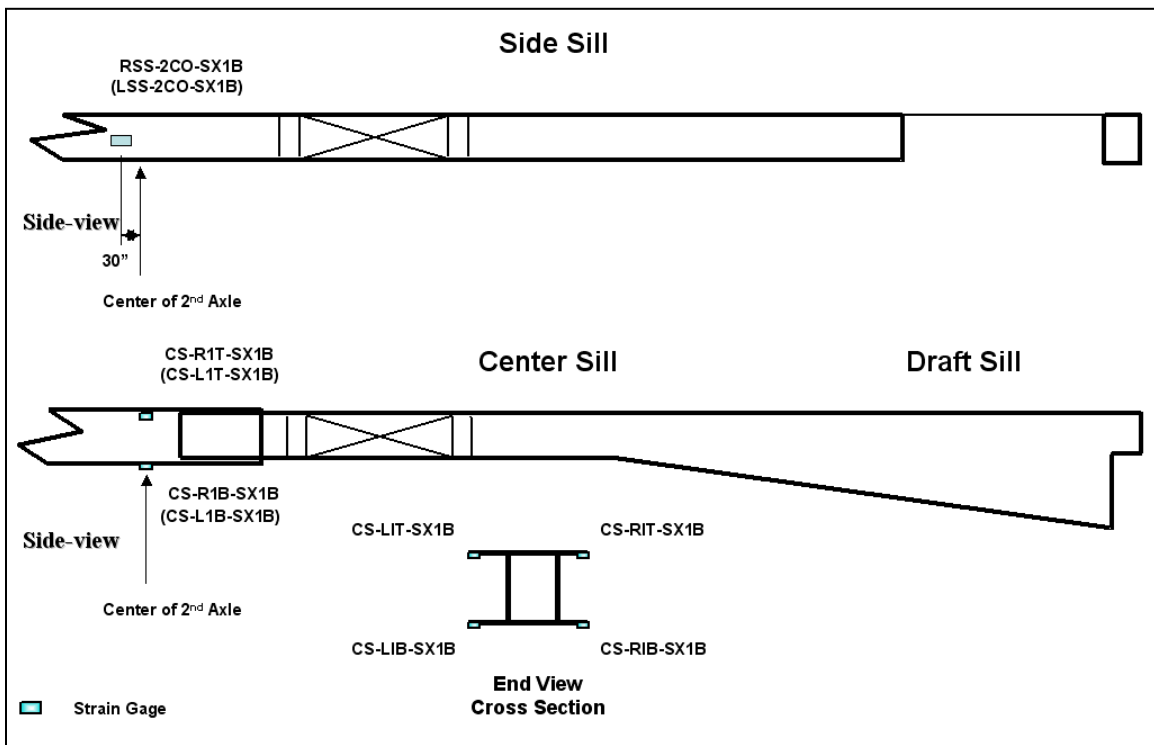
Strain Gauge Layout on Car 248 (Trailing) Center and Side Sills
